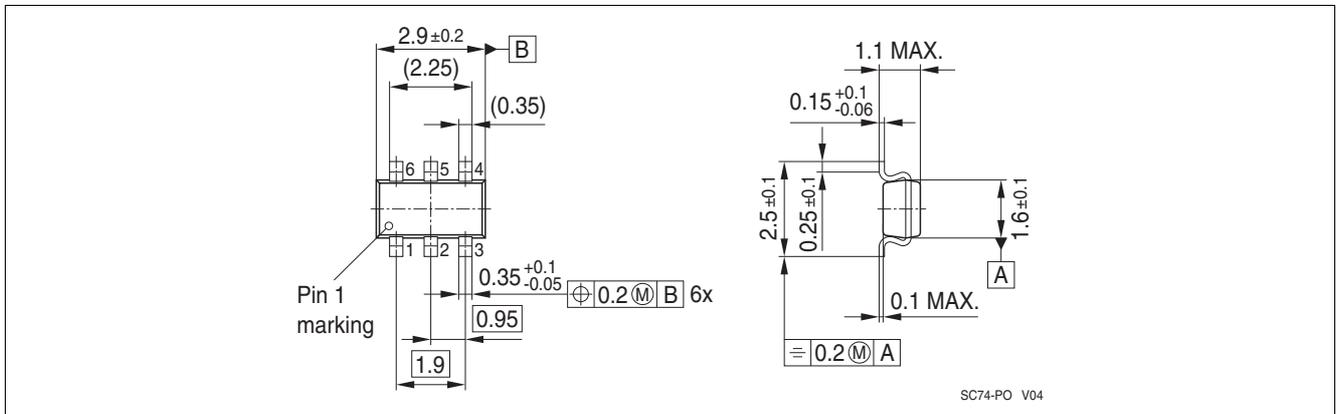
Package Outline for SC74 (dimensions in mm)
